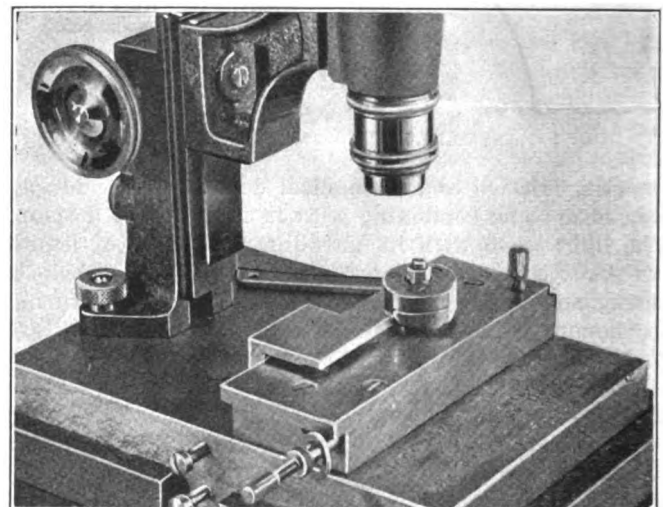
GAGE FOR CHECKING THE MASTER TOOL
